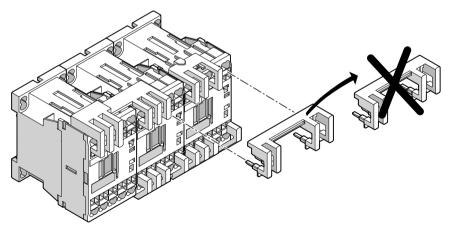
Removal of the wiring modules for connecting the control current paths on a contactor assembly for star-delta (wye-delta) start with spring-loaded connections of size S00
